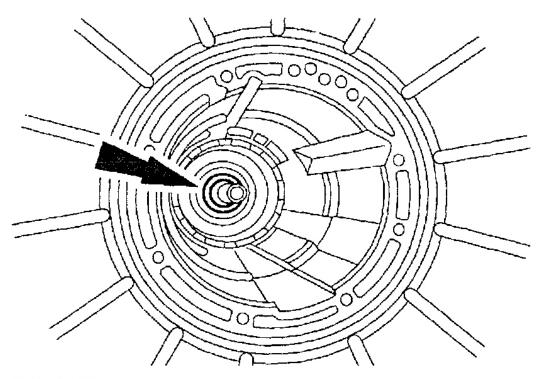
Removing Output Shaft Ring Gear & Hub
